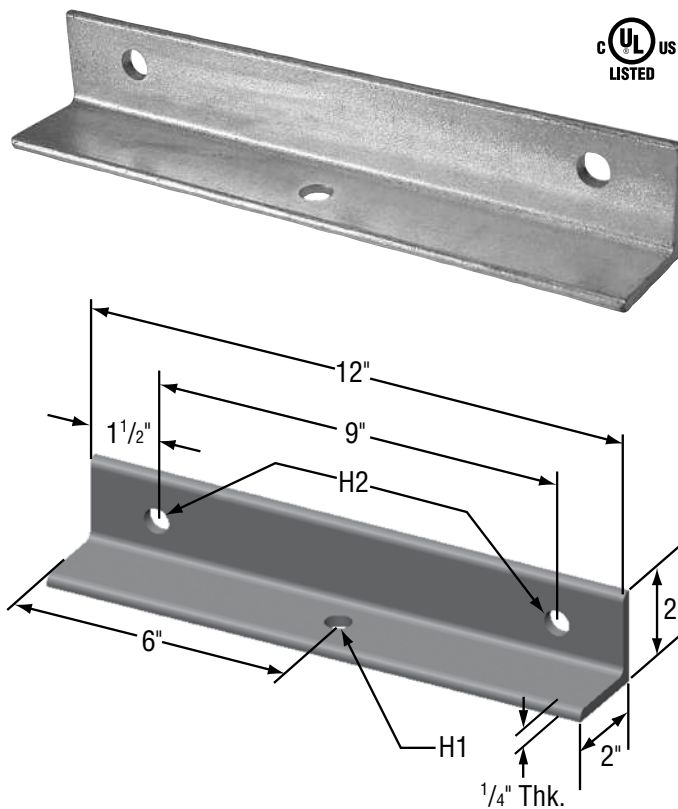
UL MAX LOAD: DIMENSIONS (IN) • LOADS (LBS)
